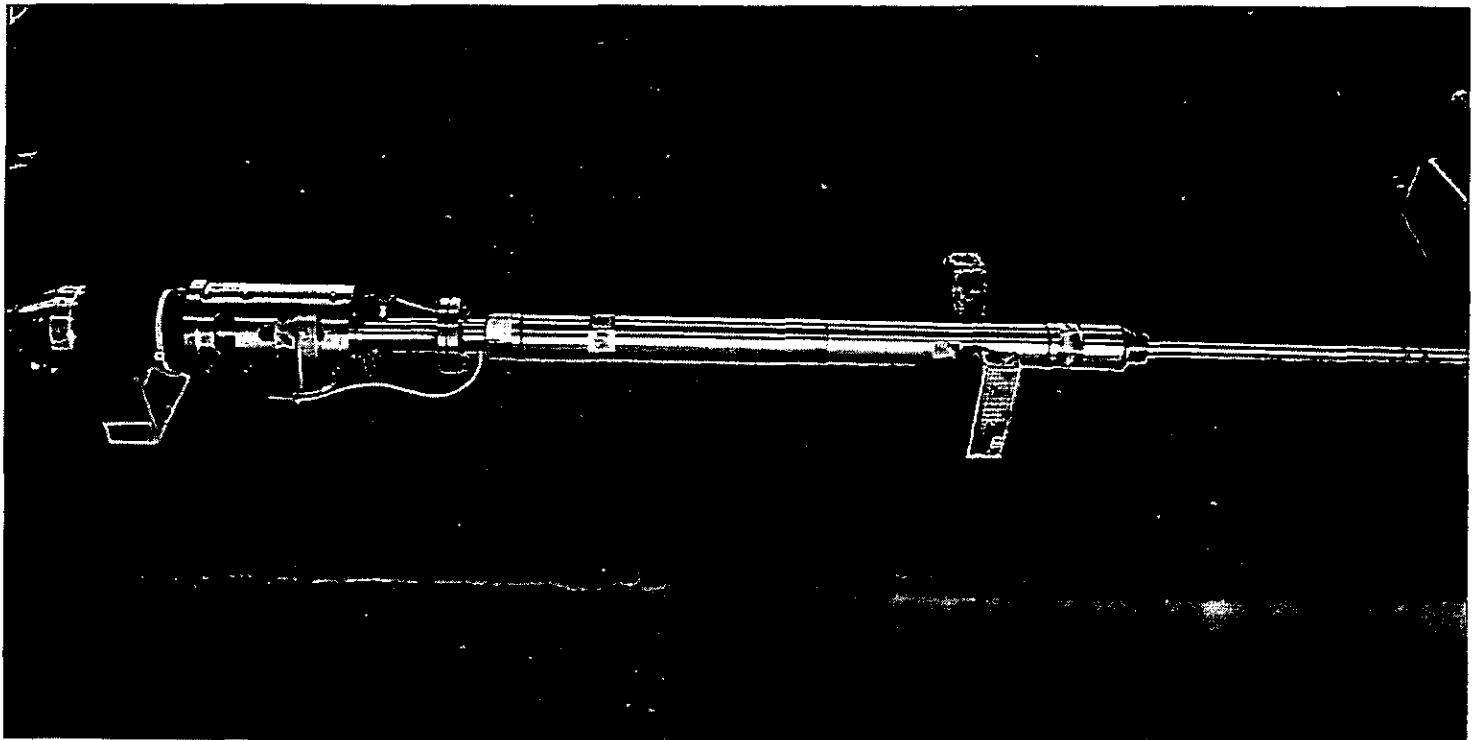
ASSEMBLY OF THE ELECTRO-MECHANICAL TIP CLEARANCE PROBE.
